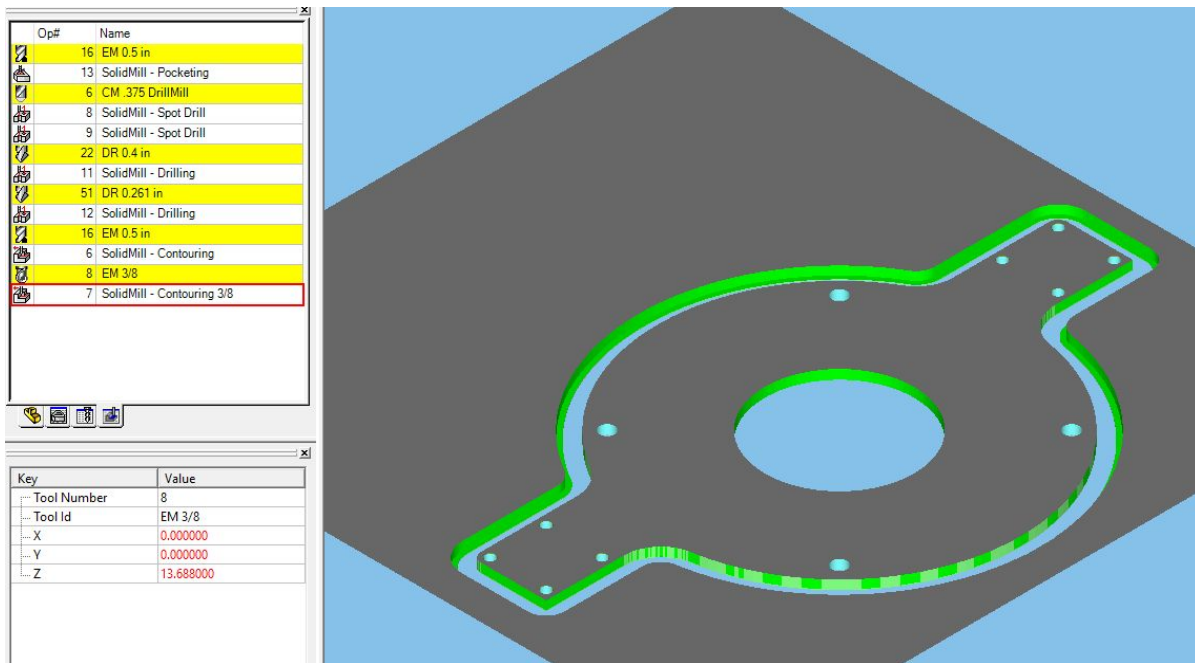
Motor Mount Front Plate ESPRIT Simulation
